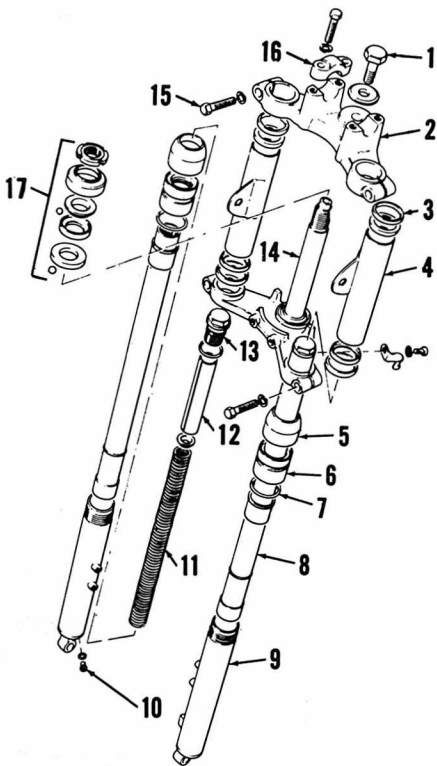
Exploded view of front suspension system used on 90cc Suzuki.
